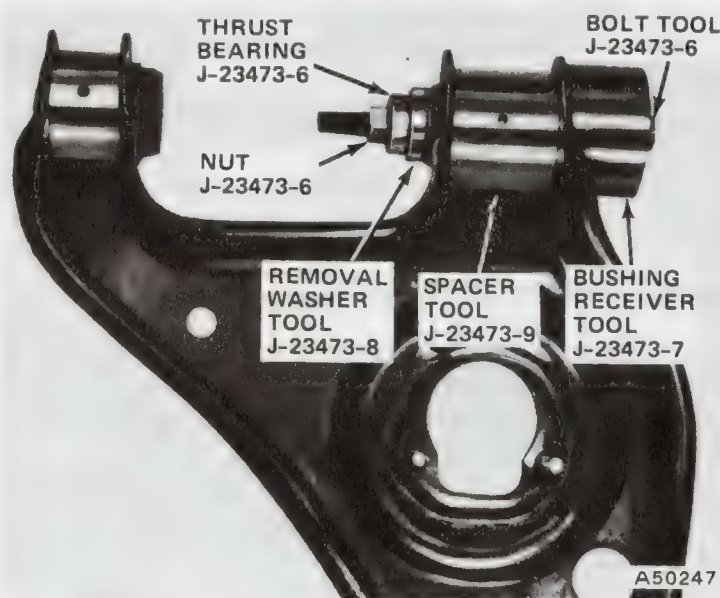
M-43 Lower Control Arm Front Bushing Removal
